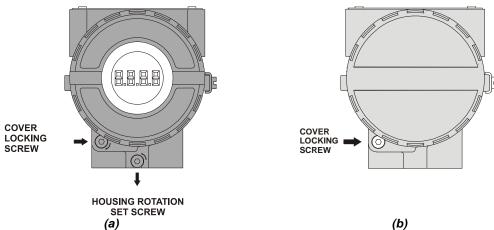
Cover Locking and Housing Rotating Set Screw (a) Electronic Board Side (b) Terminal Connection Side
